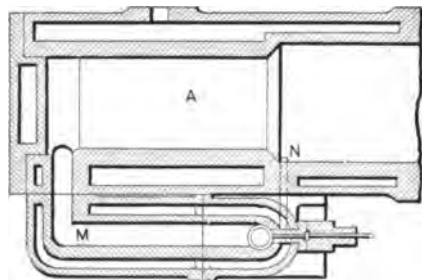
THE ROCKET PETROLEUM ENGINE, BUILT BY ROBERT STEPHENSON & CO., NEWCASTLE, ENGLAND
